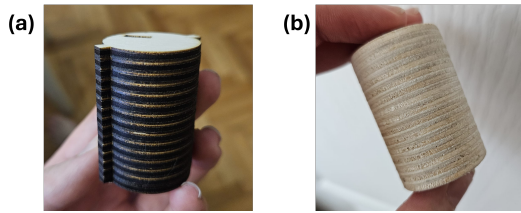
Manufacturing of AM samples: (a) layers after assembly, but before lathe processing; (b) after lathe processing.
